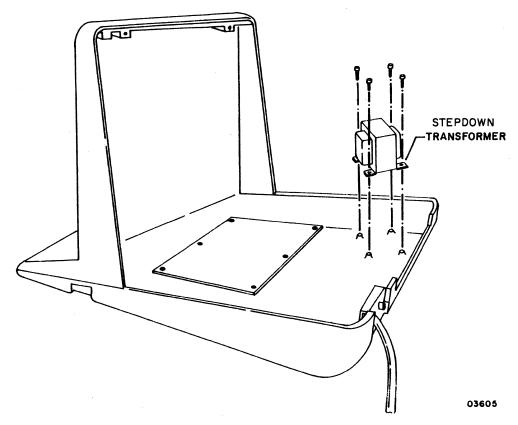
Stepdown Transformer Removal (Applicable Only to International Units)
